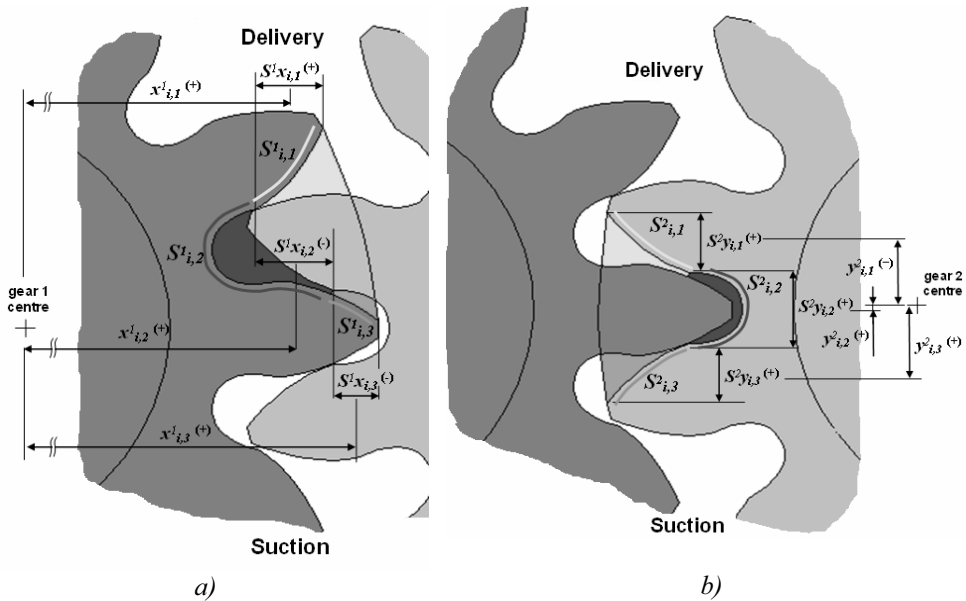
Subdivision of the surface between adjacent teeth on same gear for driver gear (a) and driven gear (b).
